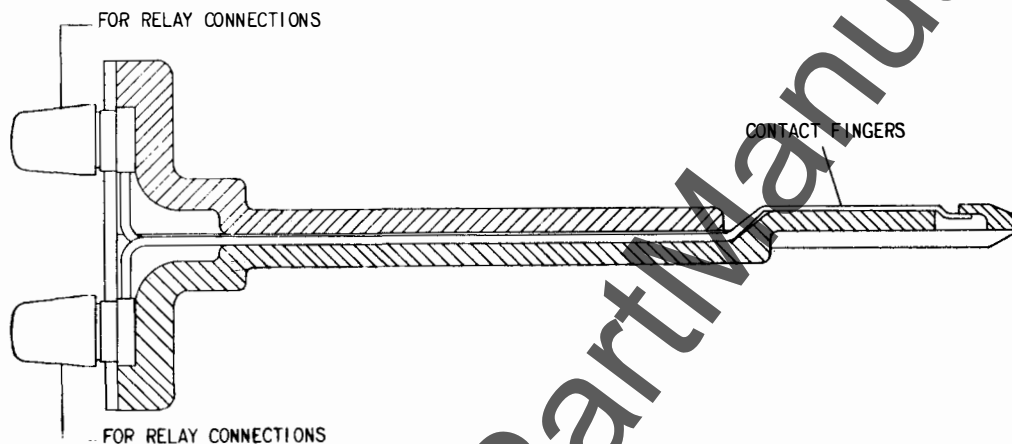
Sectional View of XLA13A Test Plug Showing Internal Wiring
